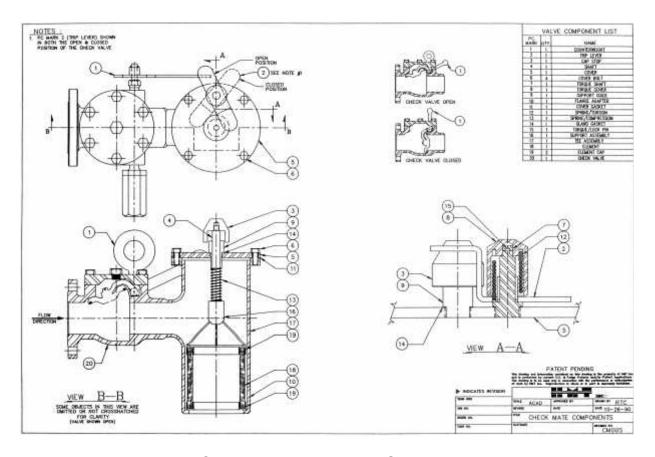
Check Mate Hydrocarbon Sensing Valve Details
